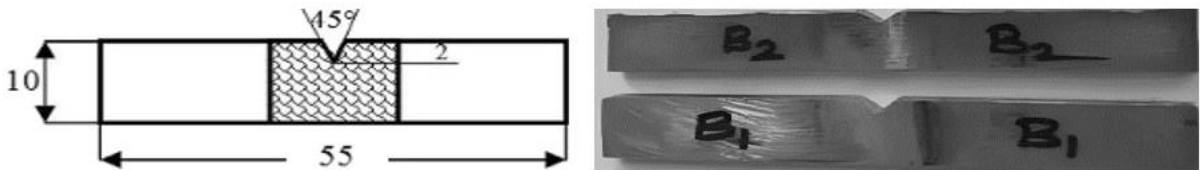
Standard Dimensions of Impact Test Samples and Actual Samples
